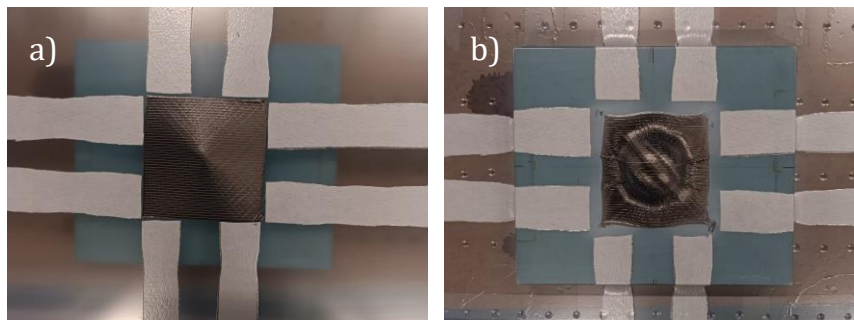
Fabric material a) before and b) after vacuum is applied between the lower diaphragm and the tool.
